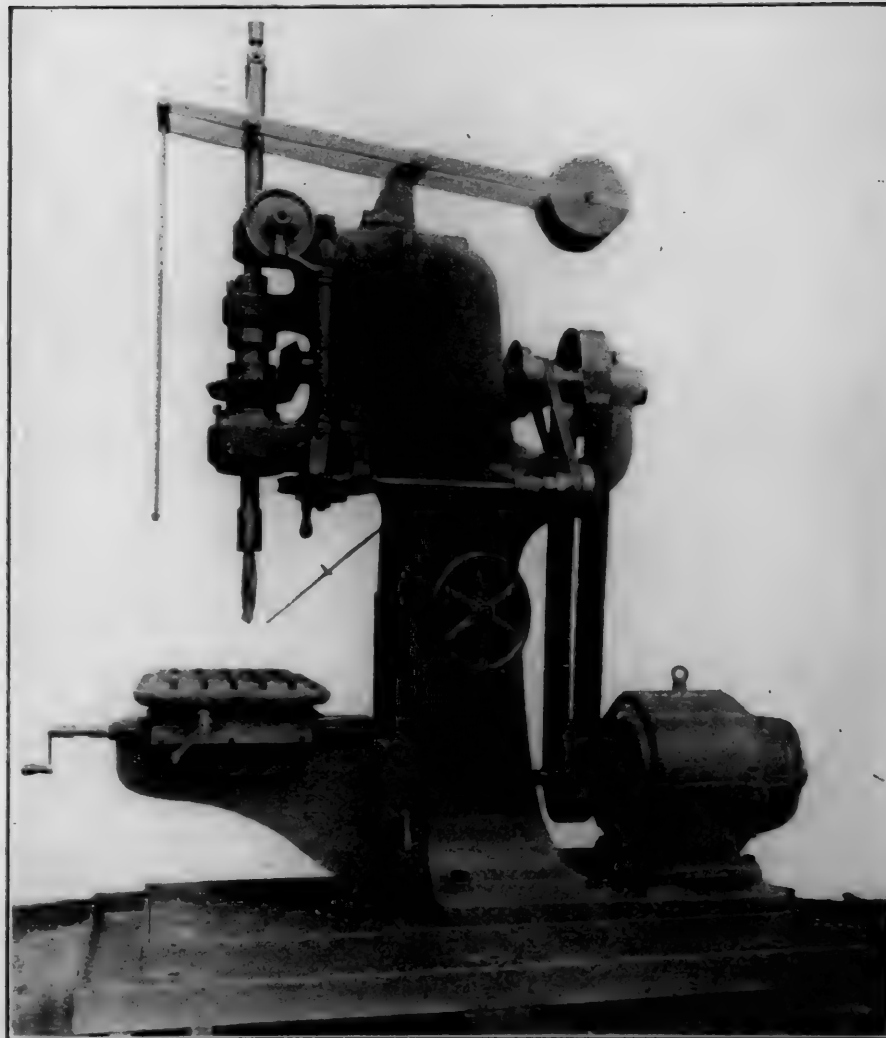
HIGH SPEED DRILLING MACHINE—400— $\frac{7}{8}$ INCH HOLES DRILLED THROUGH 3 IN. CAST IRON AT 18 IN. FEED PER MINUTE WITHOUT INJURING DRILL.
